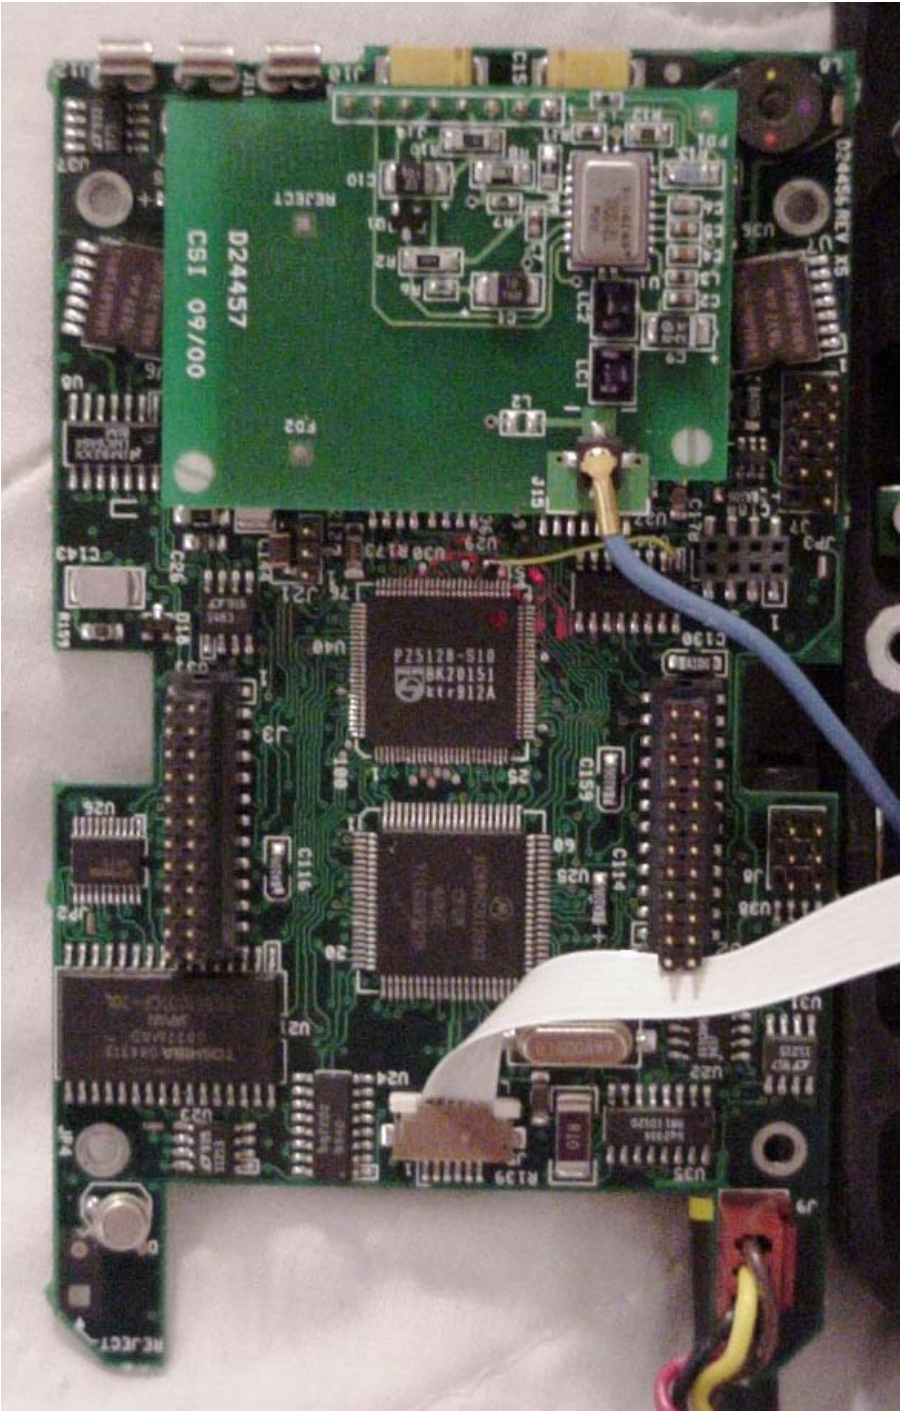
EUT, Bottom View of Laser Alignment Head CPU Board (TX Board Removed)
